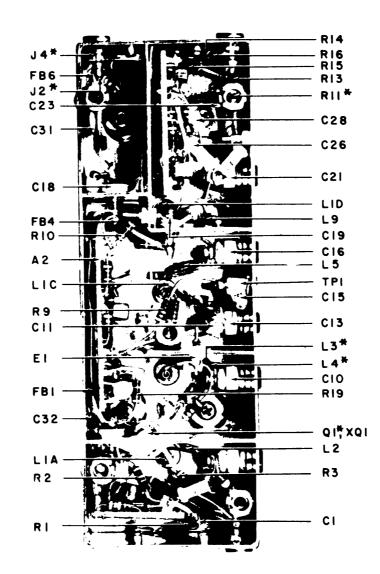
WJ-9121 20-250 MHz Tuner Assembly, Bottom View, Location of Components
